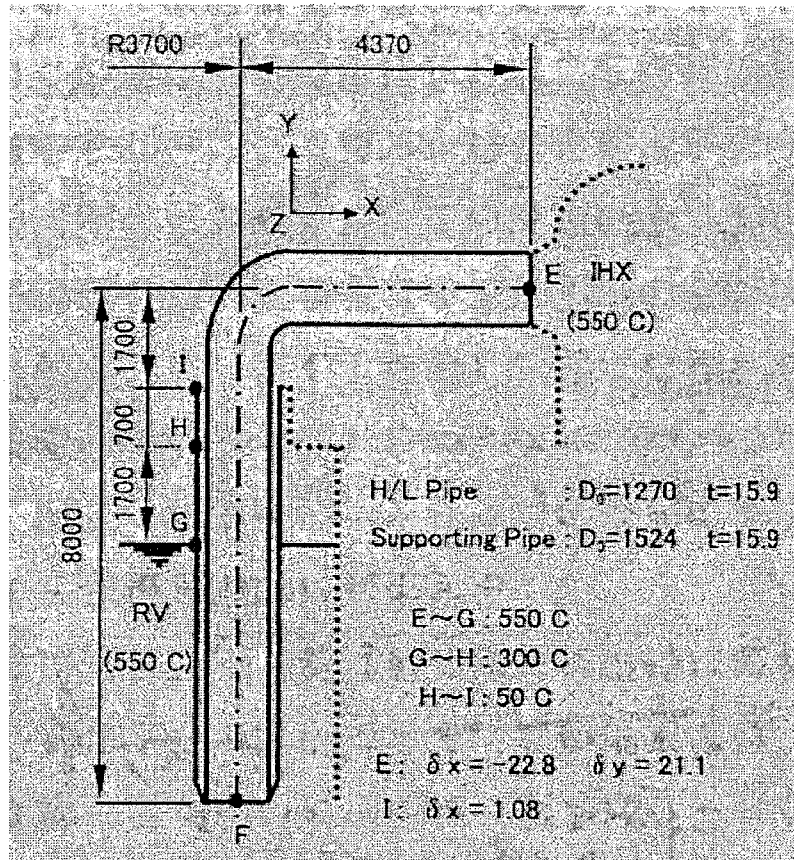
Shape and dimensions of the assessment parts [3]
